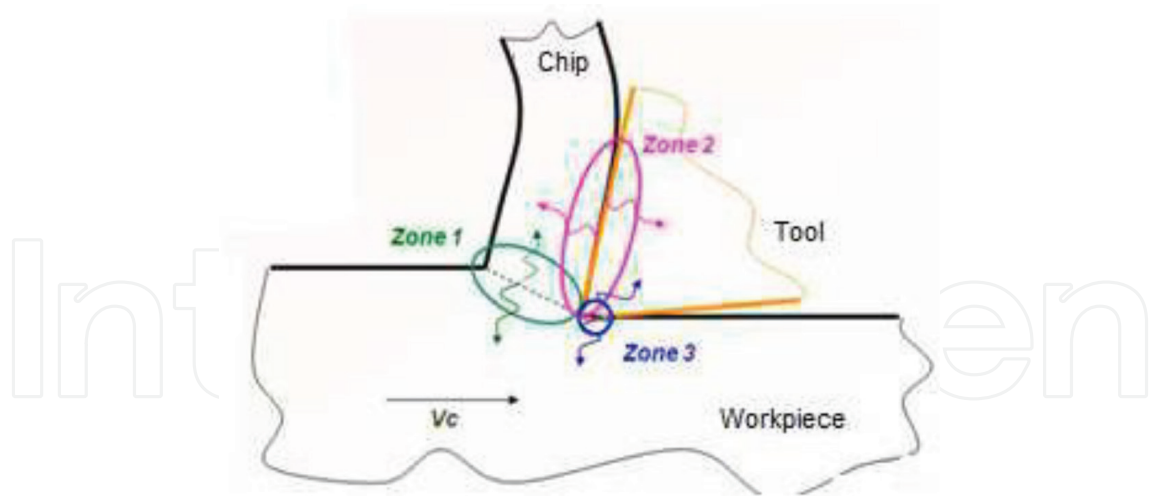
Orthogonal cutting zone. Zone 1 Primary shearing zone. Zone 2 Secondary shearing zone (interface friction tool/chip). Zone 3 Tertiary friction (interface tool/workpiece zone).
